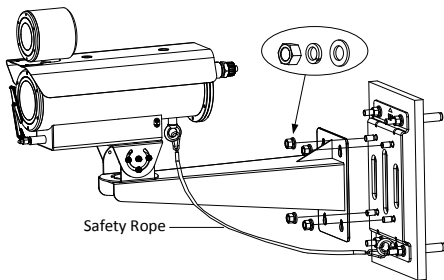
Fix the Wall Mounting Bracket to Mounting Base
